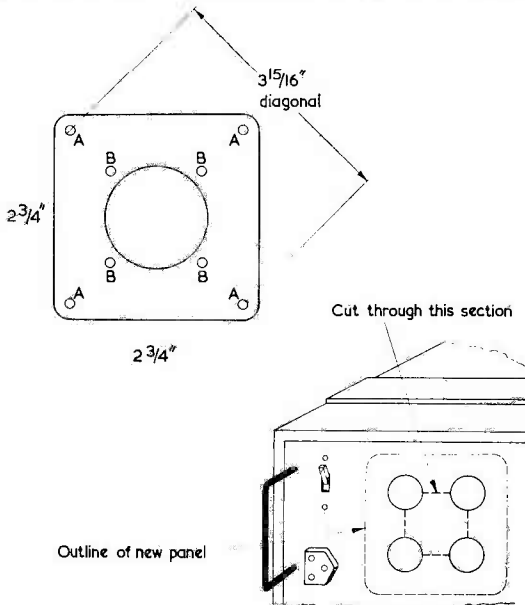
Fitting a tuning meter panel. Holes "A" are countersunk and match the existing speaker holes. Holes "B" are for the meter mounting screws and should be appropriately positioned. The large hole in the panel takes the meter body
